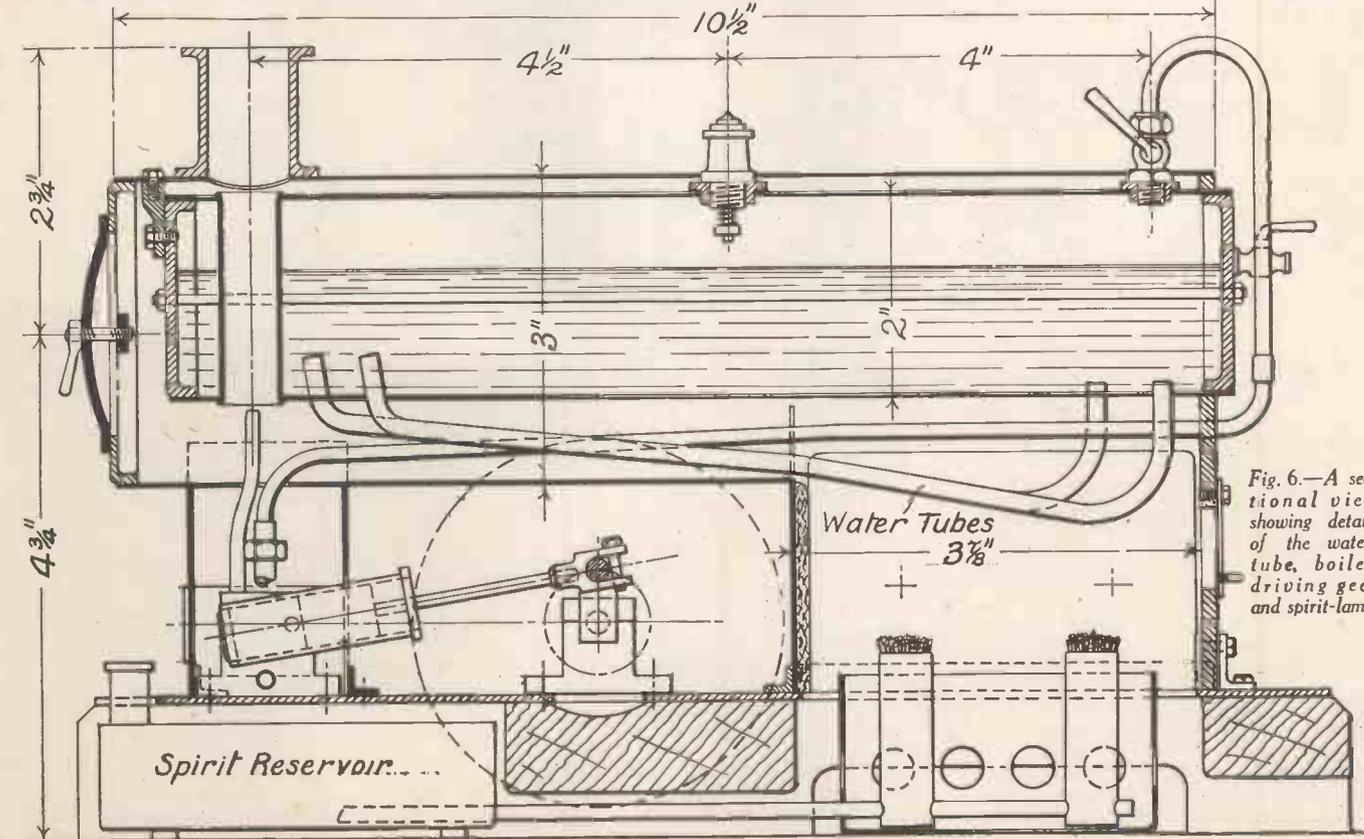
A sectional view showing details of the water-tube, boiler, driving gear and spirit-lamp.
